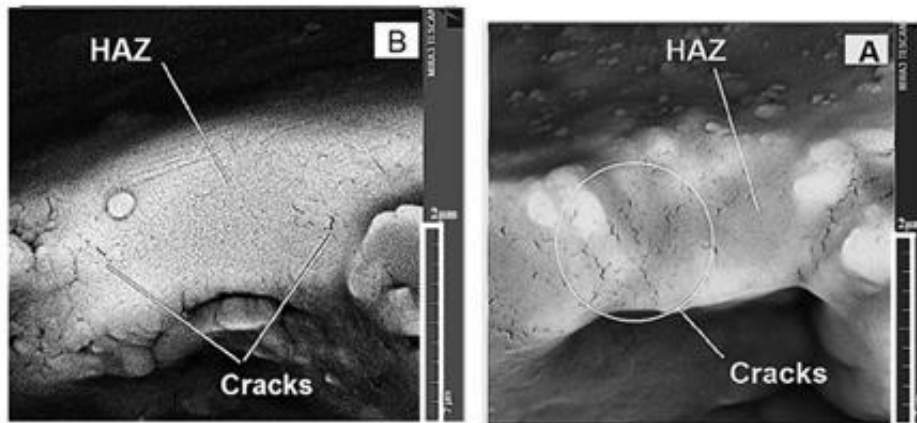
SEM Images Showing HAZ Region; (A) Image of Cross Section of Failure in Forming Piece with Laser Power 1500w and Laser Scan Speed 0.5m/min. (B) Image of Cross Section of Failure in Forming Piece with Laser Power 800w and Laser Scan 1.5m/min
